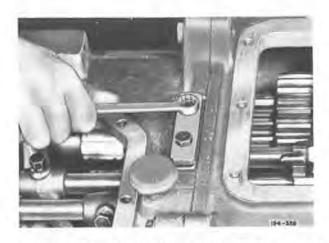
Removing Shifter Rail Poppet Ball Cover
